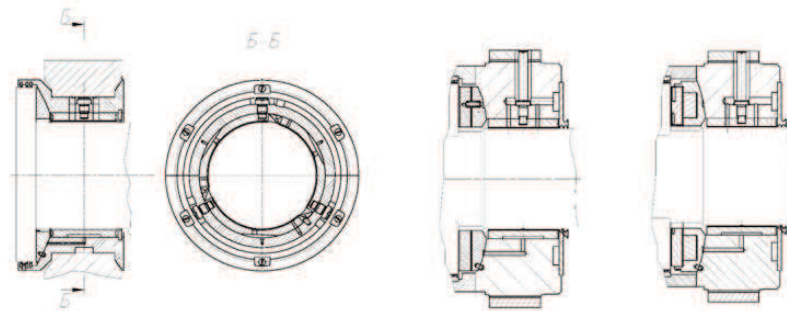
Versions of the thrust bearing equipped with the compensating hydrostatic suspension.
